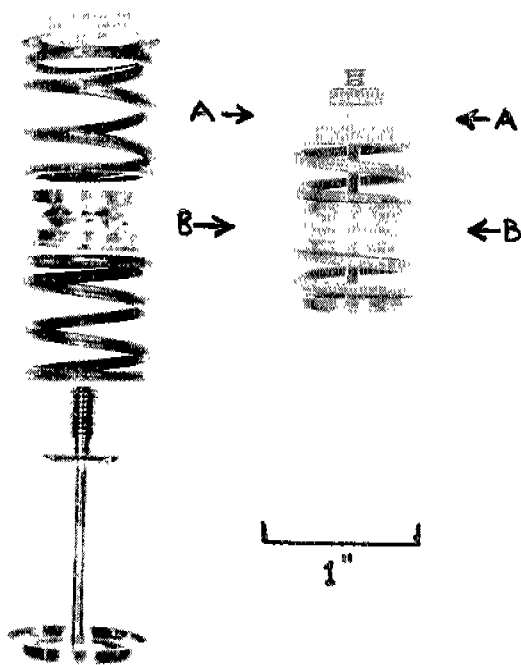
Miniature vibration isolation mount showing composite wire and associated attachment hardware: exploded view on left, assembled device on right.
